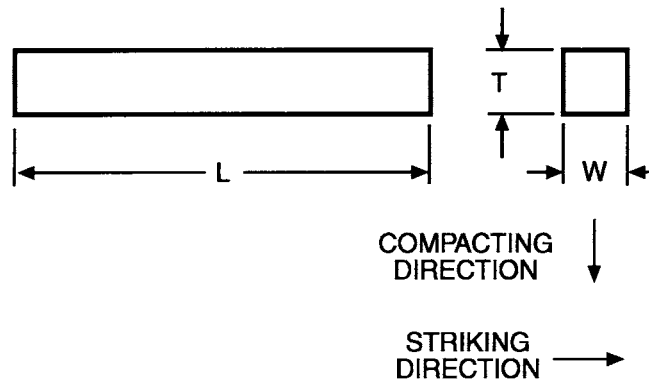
Izod Impact Test Bar for Die Castings Alloys
